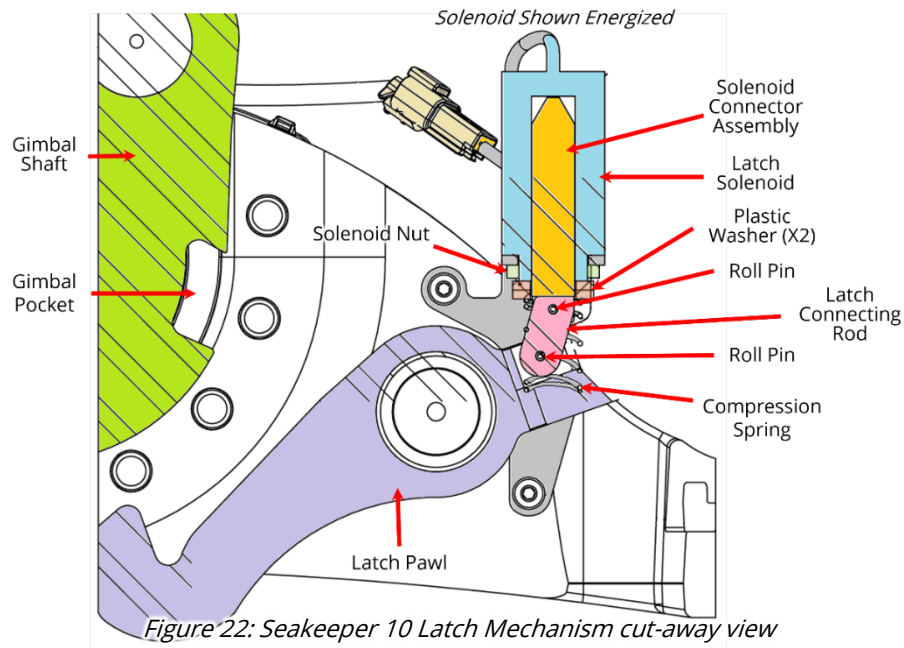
Seakeeper 10 Latch Mechanism cut-away view
